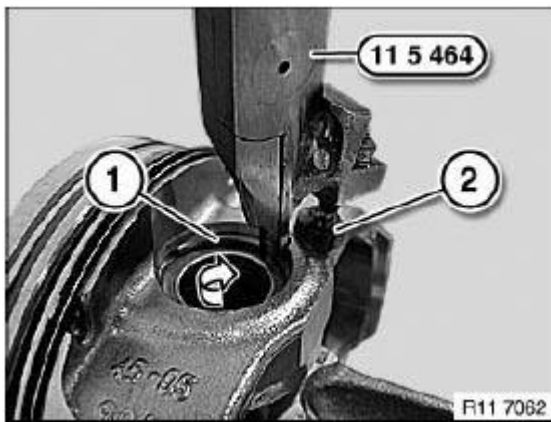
Removing Piston Circlip Using Special Tool 11 5 464
